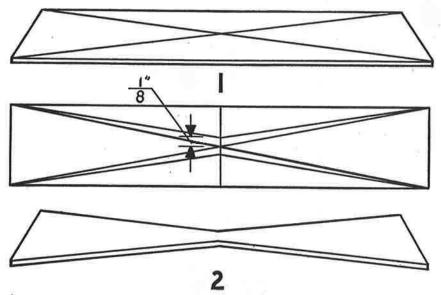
CUTTING BENT WOOD PROPELLER BLANK
